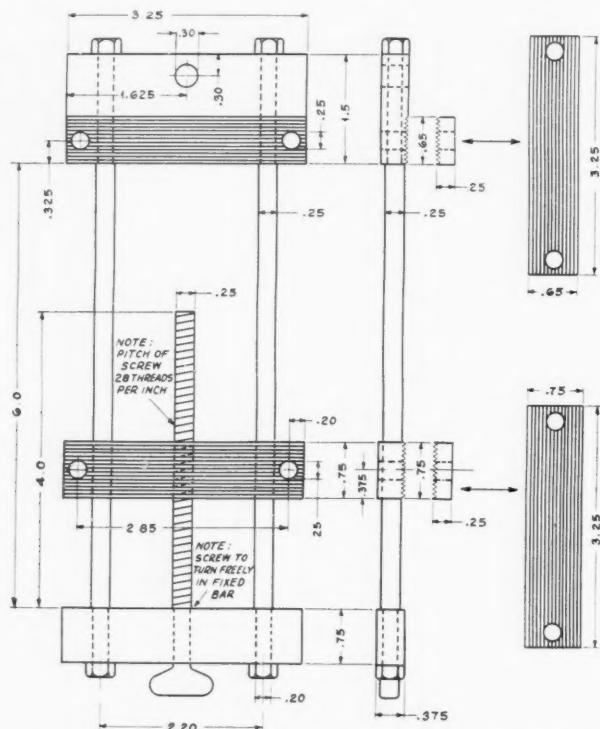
Detailed Drawing of Specimen Holder for Light Aging (All Parts except Rods to Be Made of Aluminum; Rods to Be Made of Monel)
